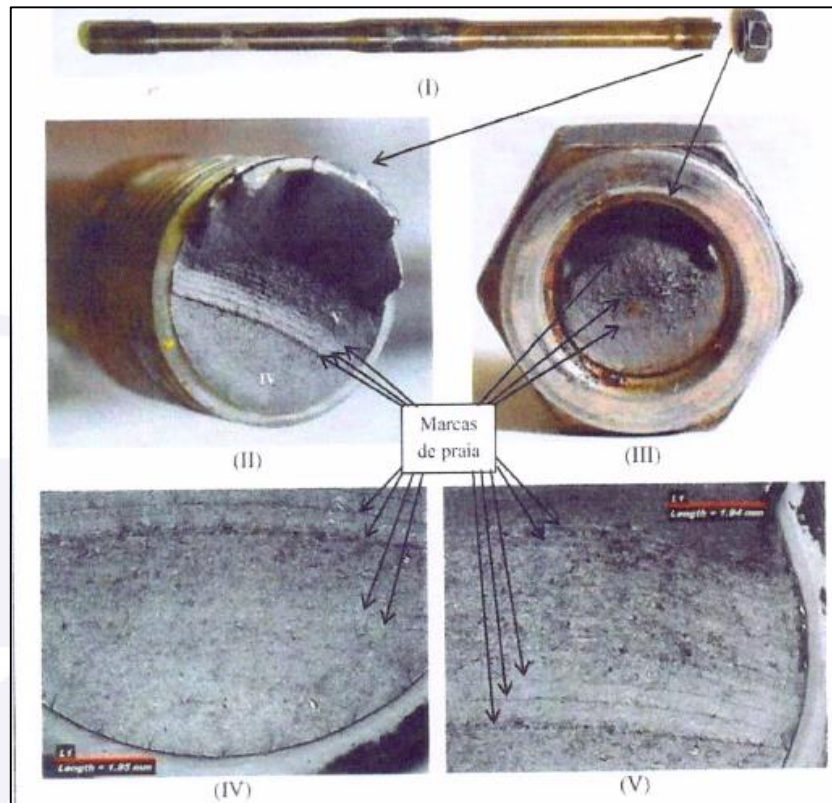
View of the fracture surfaces of the P5 stud.
